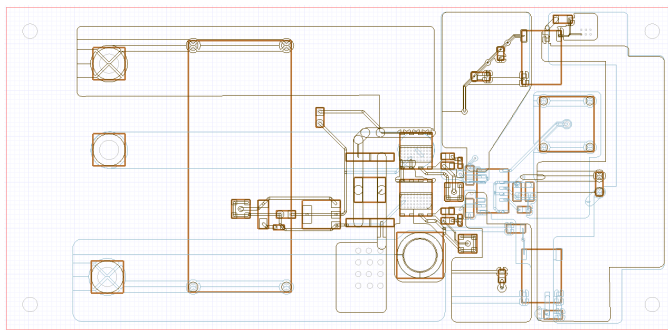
A more realistic, 4 layer PCB layout with wide areas for thermal vias. This PCB was designed using Altium Designer.
